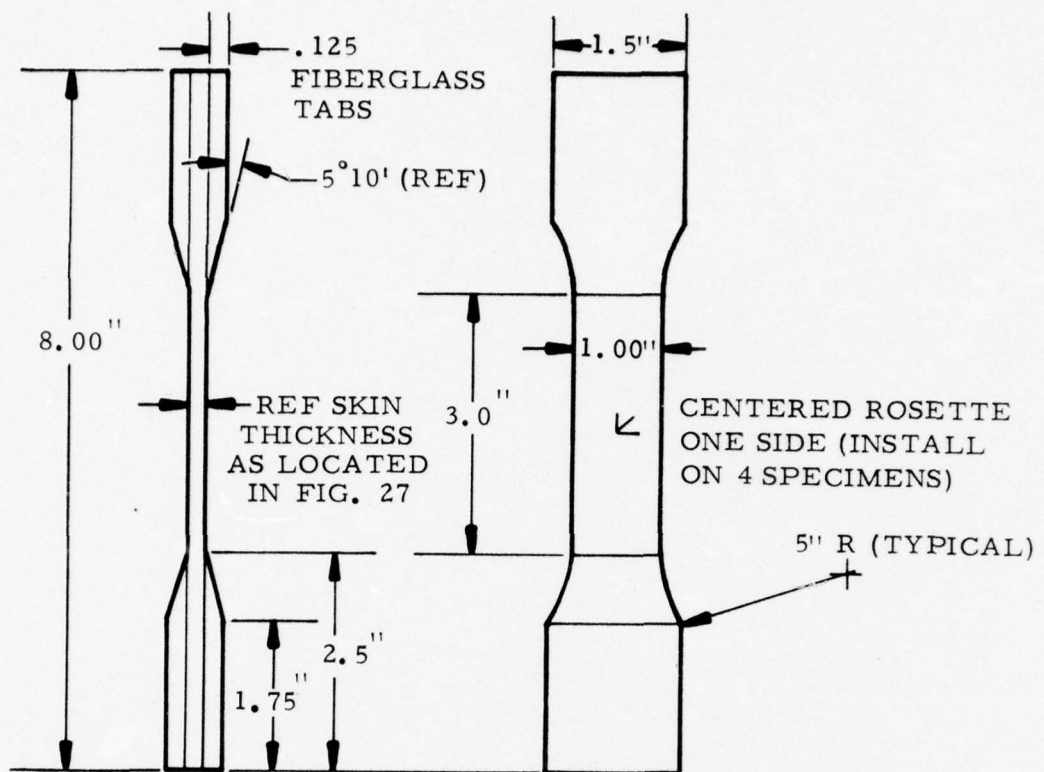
TENSILE COUPONS - MANUFACTURING DEVELOPMENT SPOILER
